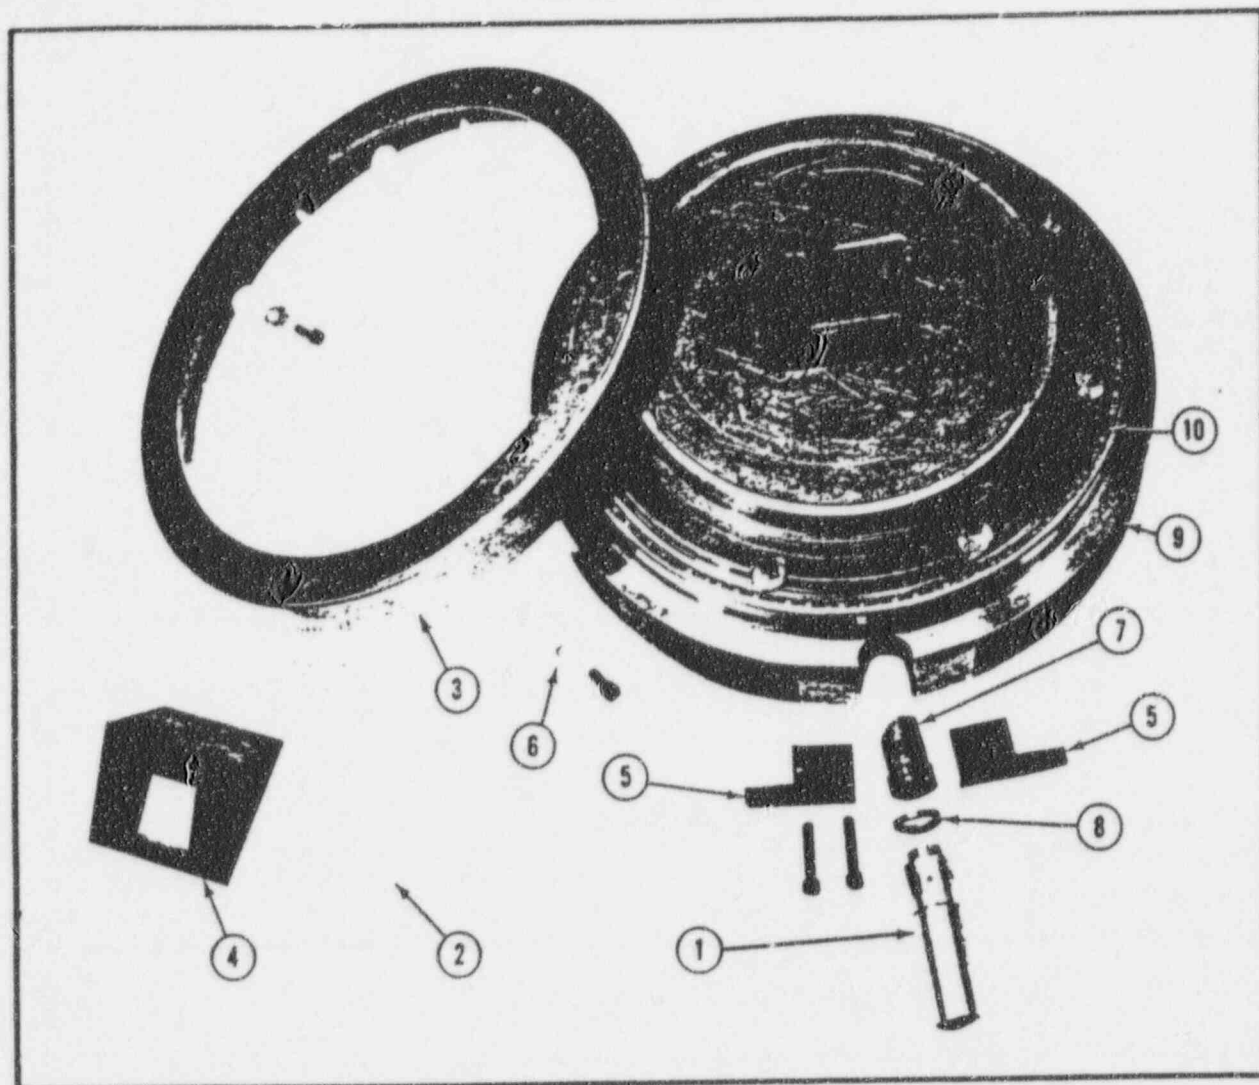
COBALT COLLIMATOR BEARING RING ASSEMBLY
